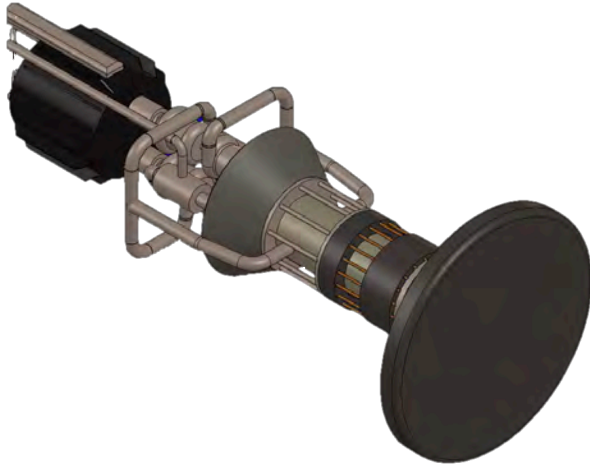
CAD drawing of the nuclear reactor at the front of the spacecraft, showing relativistic particle shield and 30 deg shadow shield for the reactor. Drawing by Tom Brosz.
